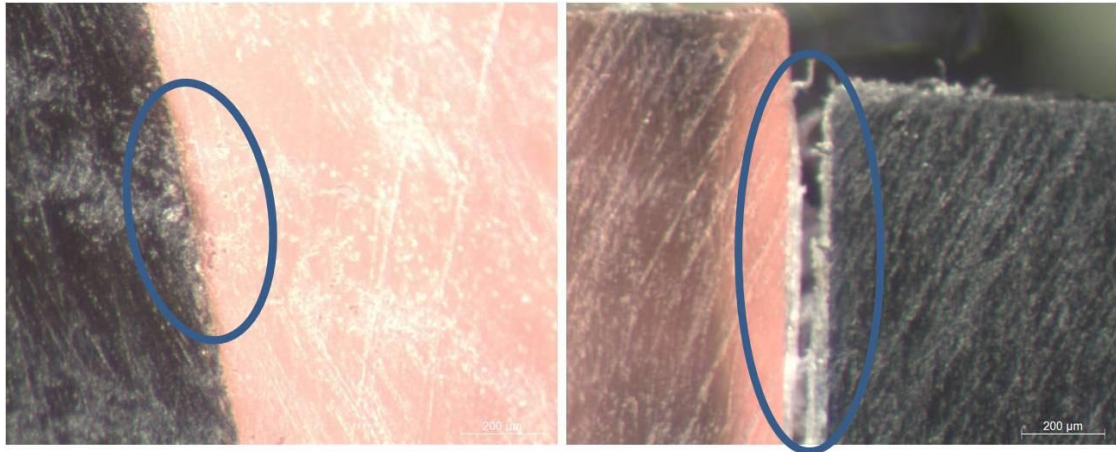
photos of the seam of the weld between PMMA with PC
